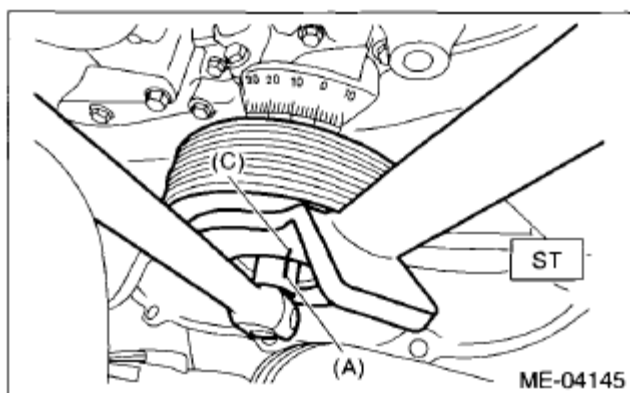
Tightening Crank Pulley Bolt To Reference Line And End Line
